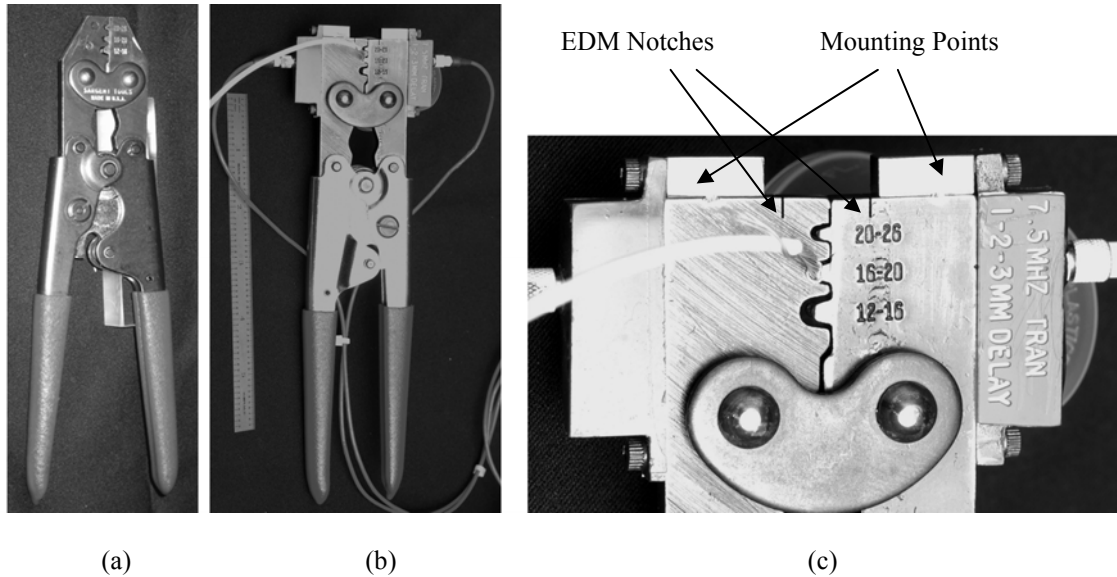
Photographs of (a) the commercially available crimp tool (Raychem Model 80-1377), (b) the tool modified for these experiments and (c) a close-up of the crimp jaws showing the details of the modifications.
